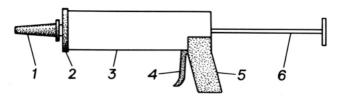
Tool for squeezing adhesive out of the cartouche: 1 – nozzle; 2 - cover; 3 – housing; 4 – lever; 5 – handle; 6 - rod
